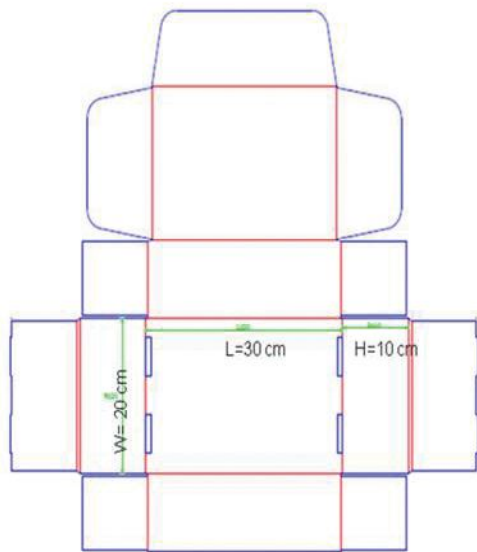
Detailed drawings of packaging with dimentions
